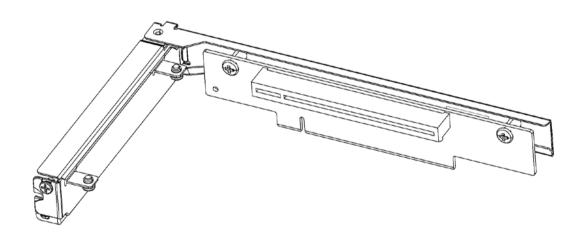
Intel® Server System SR1690WB PCI Express\* Riser Assembly
